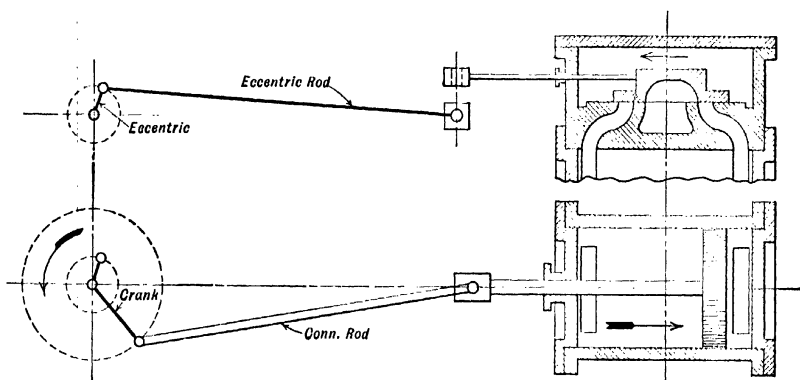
Positions of Crank and Eccentric with the Valve at Head End Compression.
